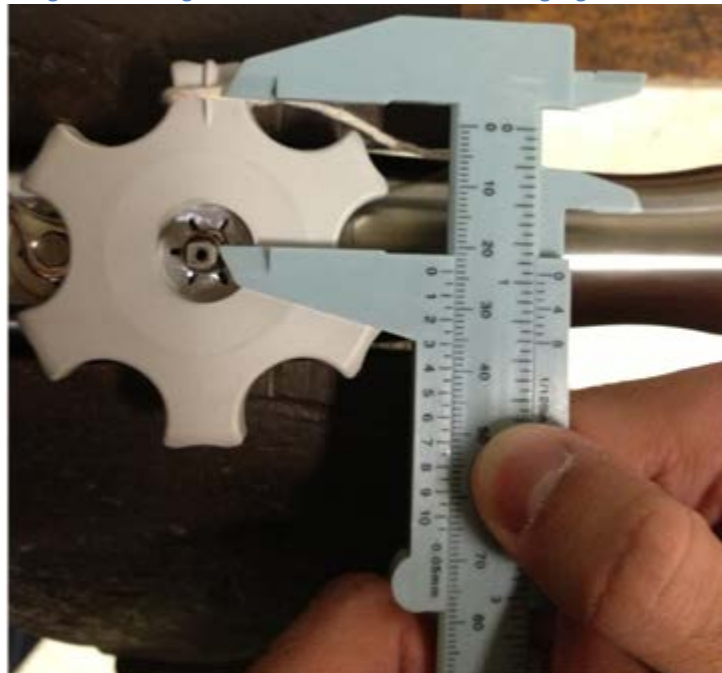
Measuring the distance from the center of the large knob to the string tie. String should be carefully secured at measured distance with duct tape
